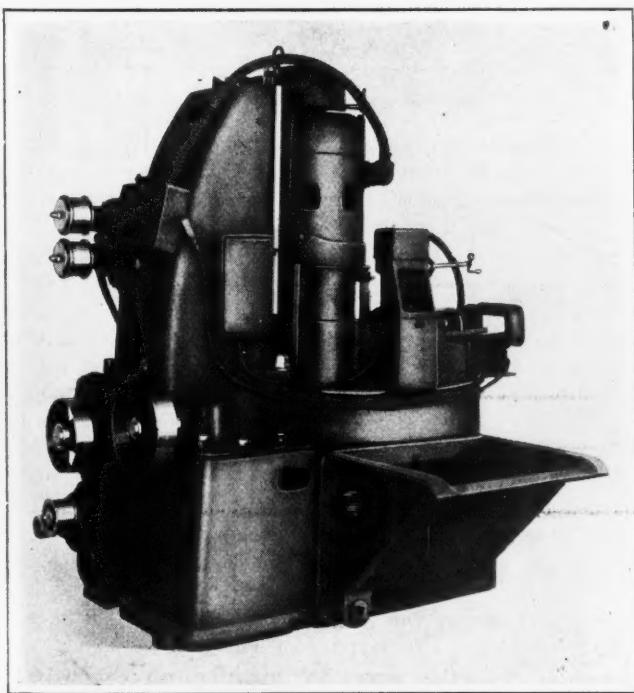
Rear View of the Automatic Machine illustrated in Fig. 1
